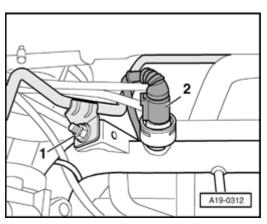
Disconnecting Electrical Harness Connector At Engine Coolant Temperature (ECT) Sensor - G2-/-G62-
